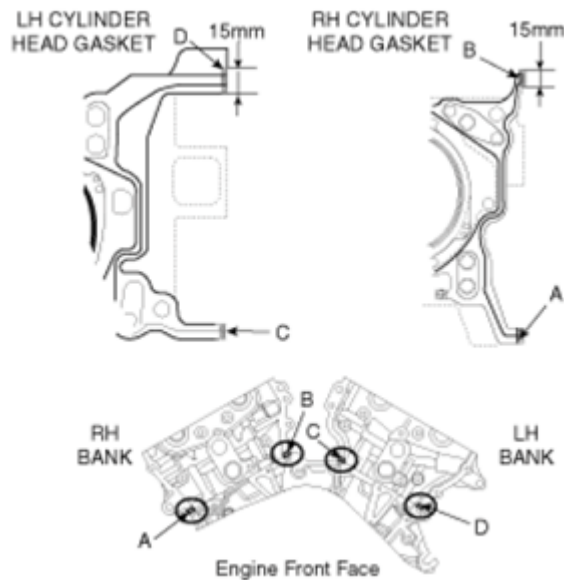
Identifying Cylinder Head Gasket Sealant Applying Portion (Right And Left)
